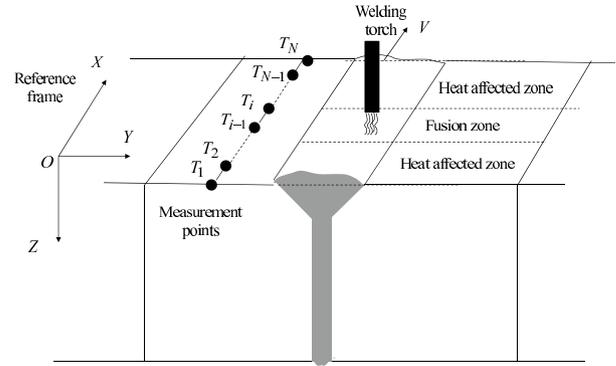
Control scheme of the nonlinear heat diffusion in the welding process
